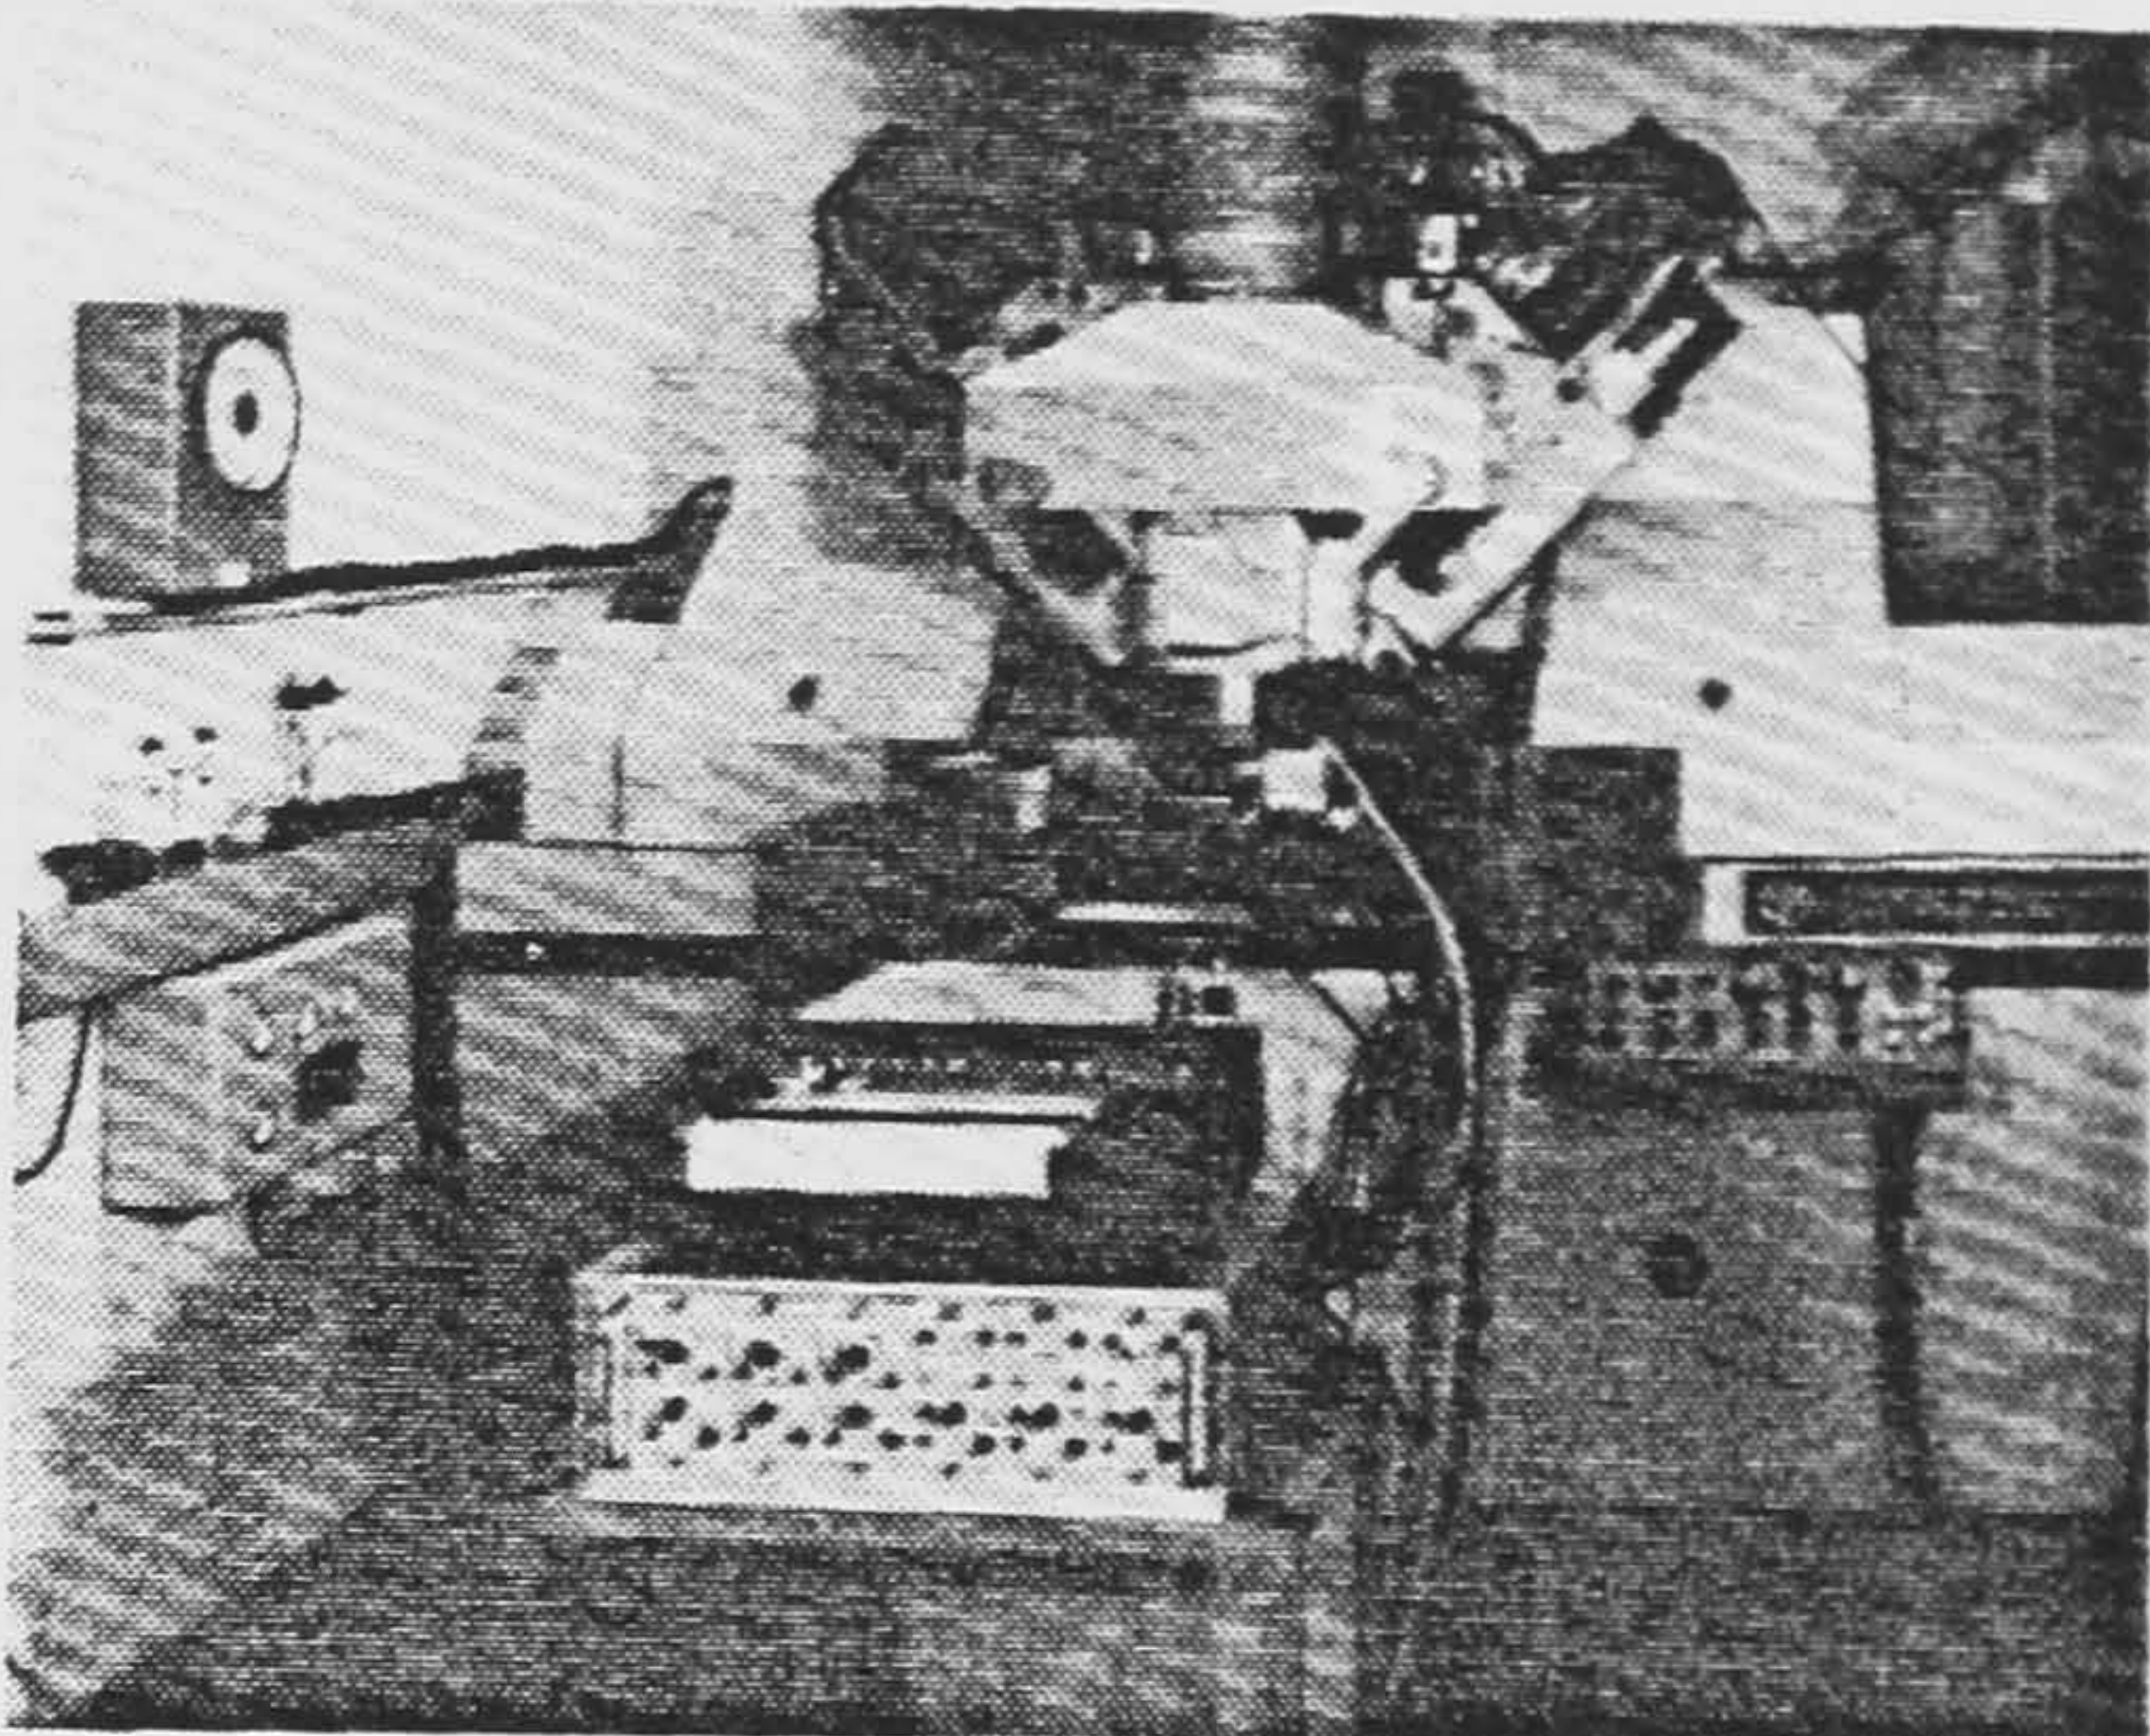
CPE Ltd 7 axis grinding machine, for computer disk read/write (flying) head production
